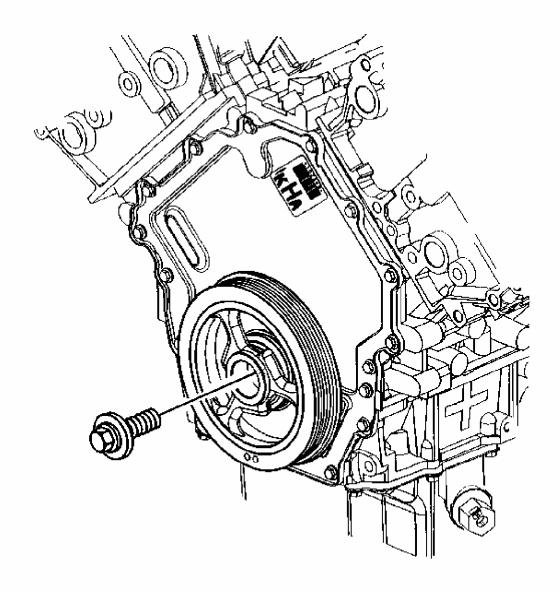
View of Crankshaft Balancer Bolt Threads Courtesy of GENERAL MOTORS CORP.
